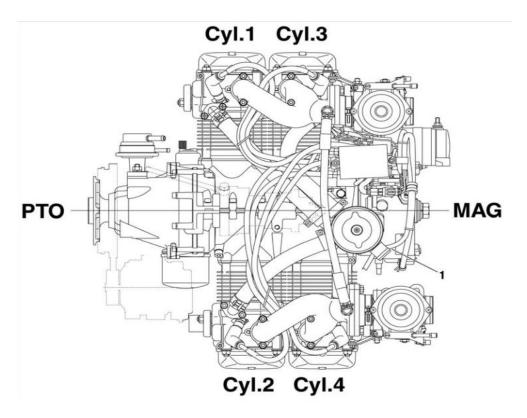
Rotax 914 Engine. (Source: Rotax 914 Illustrated Parts Catalogue)
